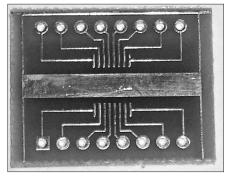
F — Surface mount ICs can be mounted to general-purpose carrier boards, then attached as a submodule with wires to the base board of the homebrew project.
